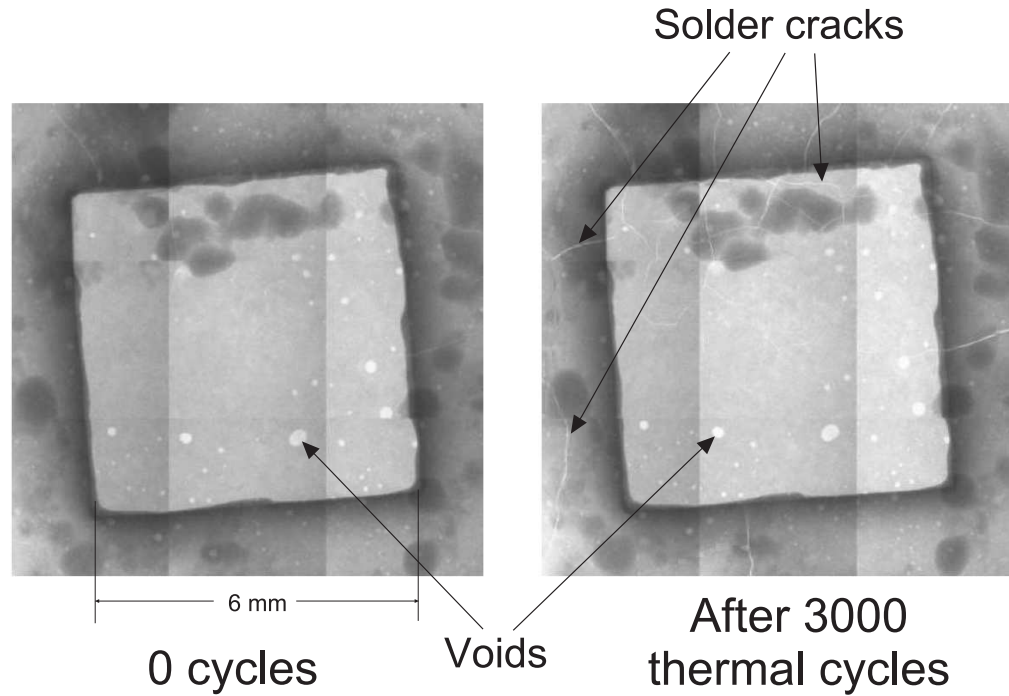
High resolution X-ray radiograph of a Au-Sn solder layer located beneath a silicon device. The solder thickness is about $75\mu\text{m}$ [60].
